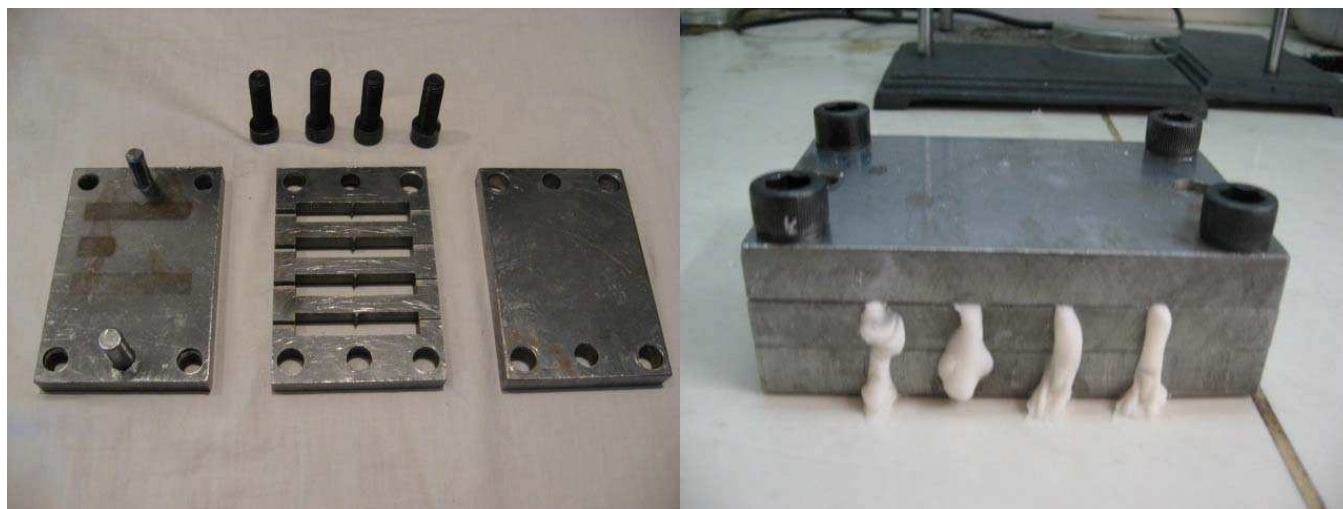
Bone cement sample preparation, disassembled carbon steel casting (left), and assembled (right)
